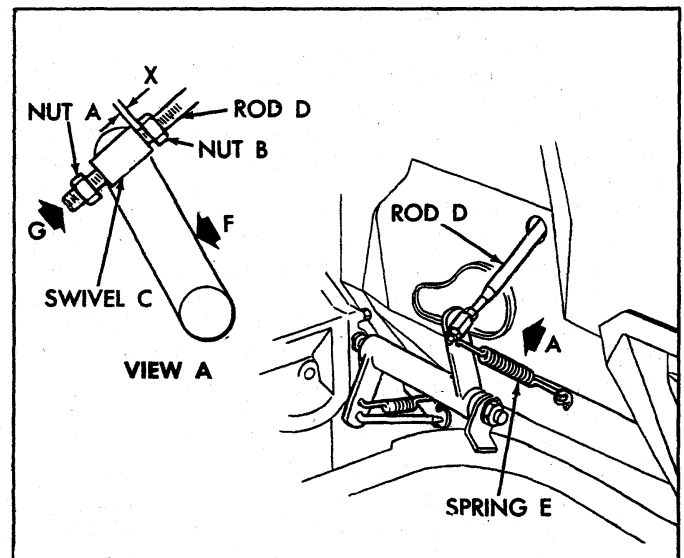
Chevrolet Clutch Pedal Free Travel Adjustment
